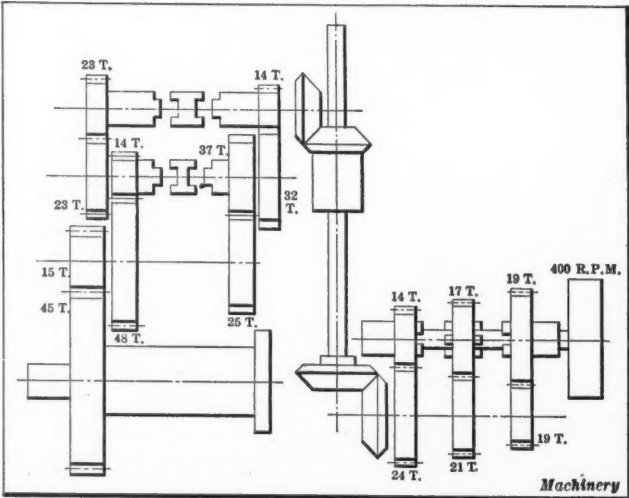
Gearing for varying Speed of Horizontal Boring Machine Spindle
